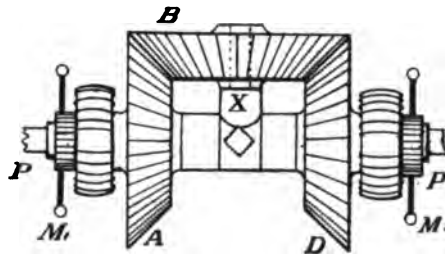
Epicyclic bevel-wheel train of mechanism.
